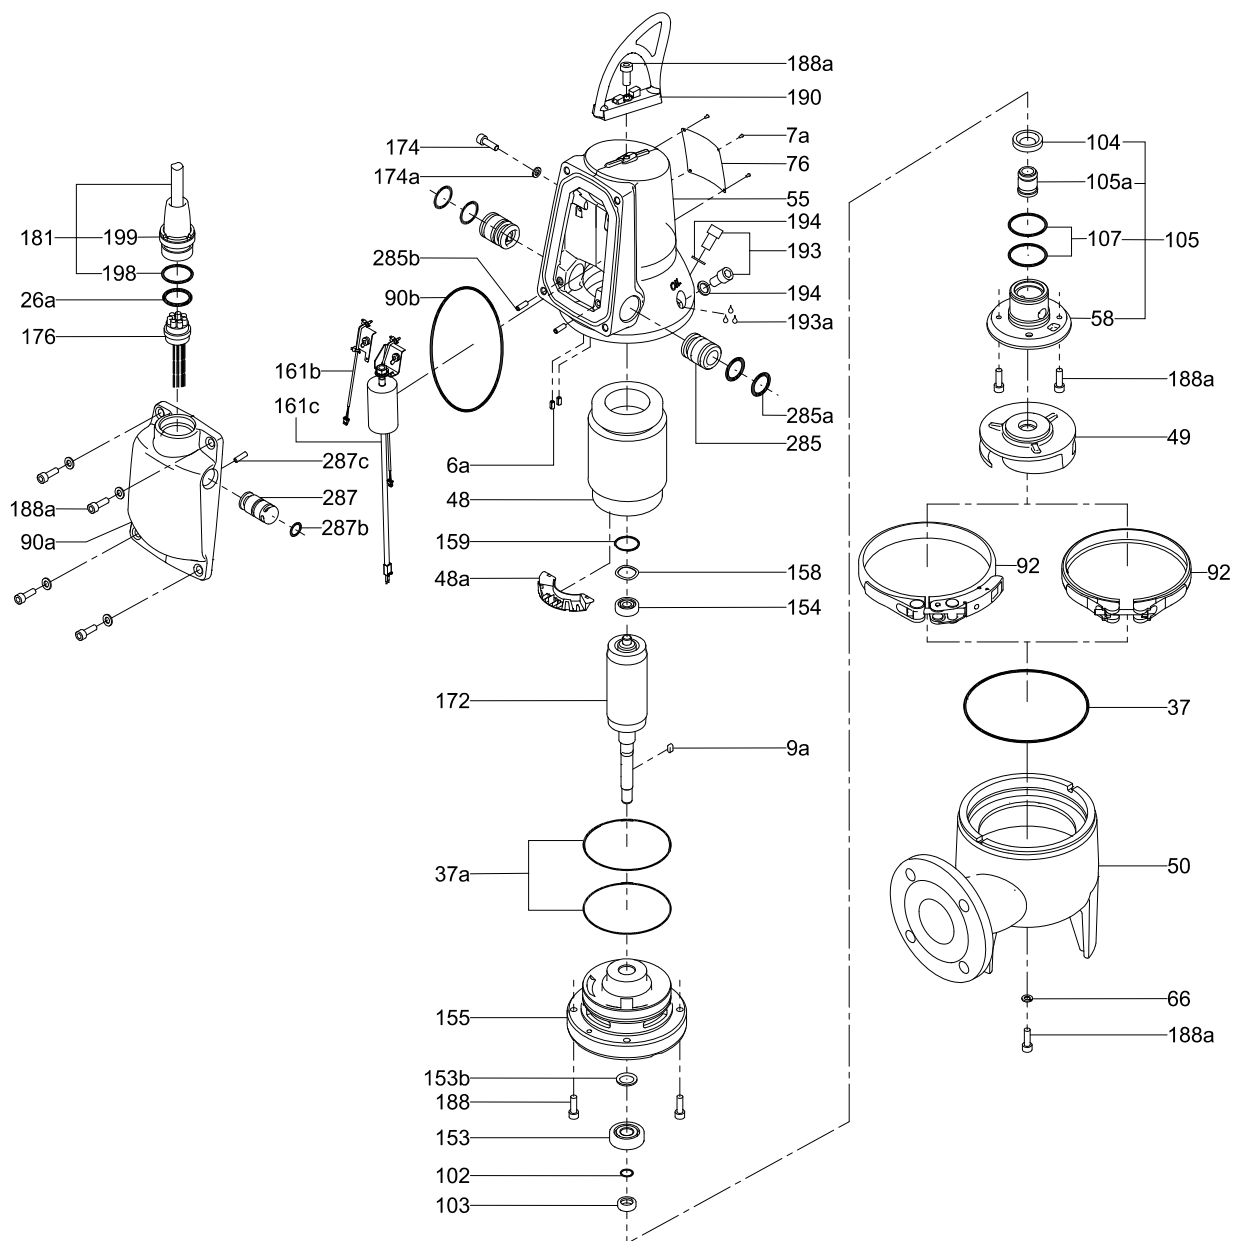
Exploded view, SLV.65.65.09/11/15 AUTO_{ADAPT}
